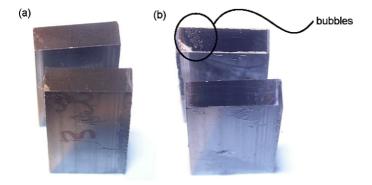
Bonding surfaces of samples that failed during sawing (a) a bar from block VA2 and (b) a bar of block VAcvd2.
